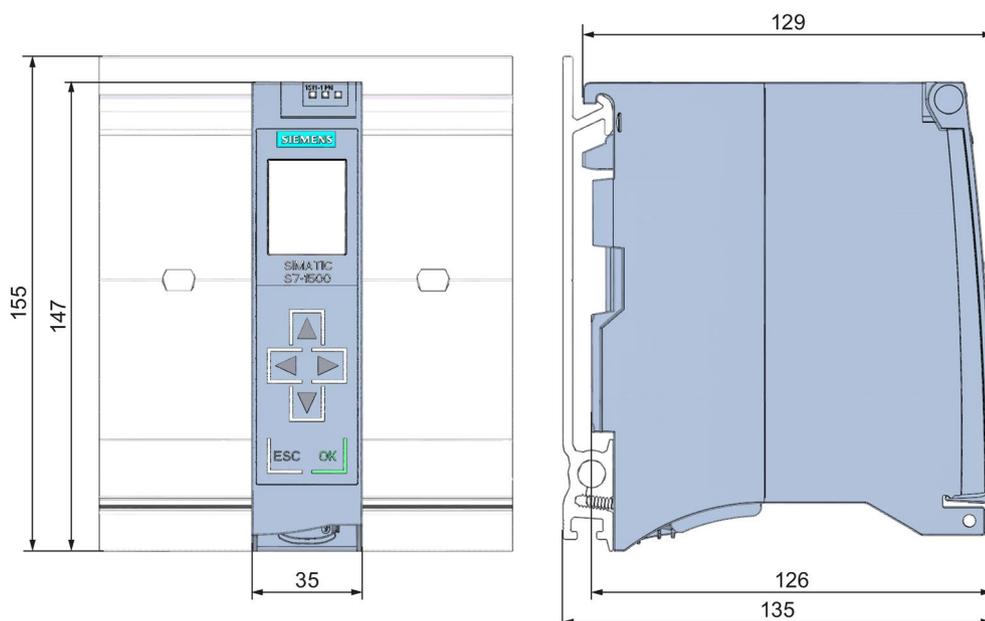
Dimensional drawing of CPU 1511-1 PN, front and side views
